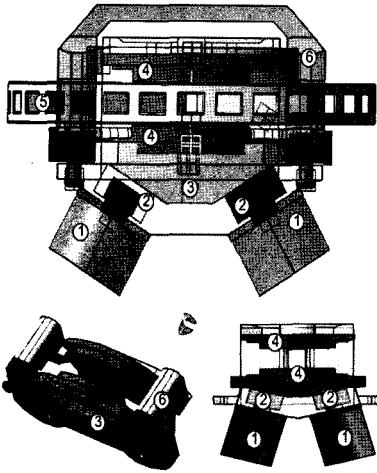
The EMB caliper with separated pressure-plates⁶⁾
